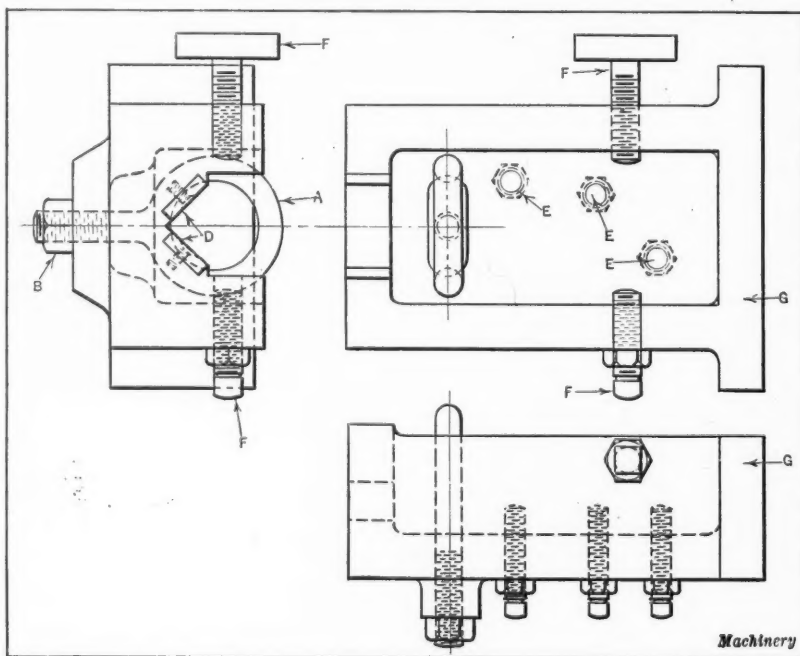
Fixture used when milling Flanges D and E, Fig. 1
